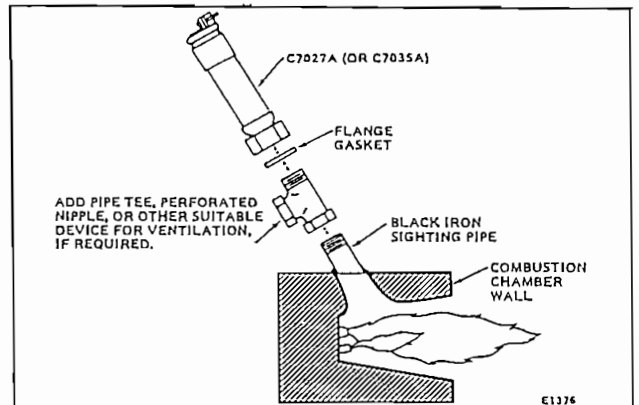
MOUNTING A C7027A ON A COMBUSTION CHAMBER (viewed from above). C7035A MOUNTING IS SIMILAR.
